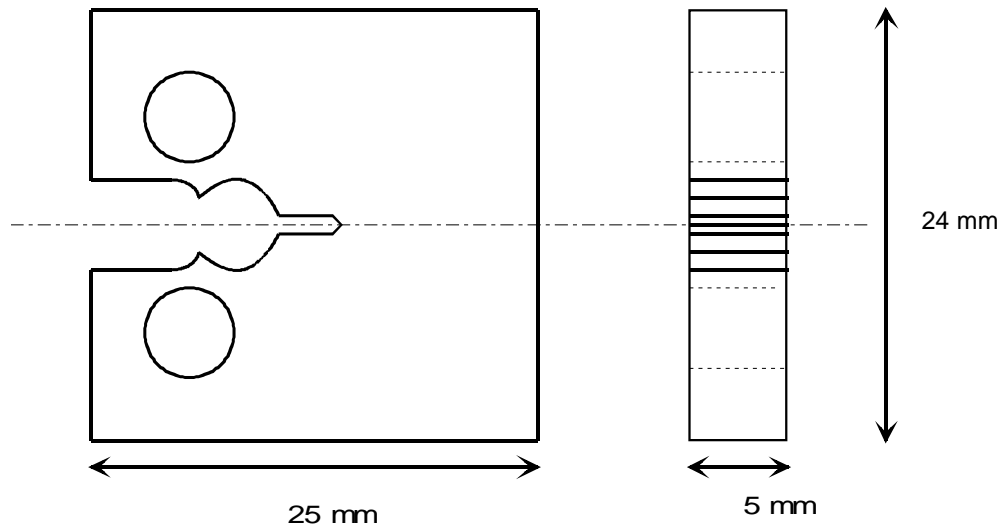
Sub-size CT-specimens for fracture toughness tests.
